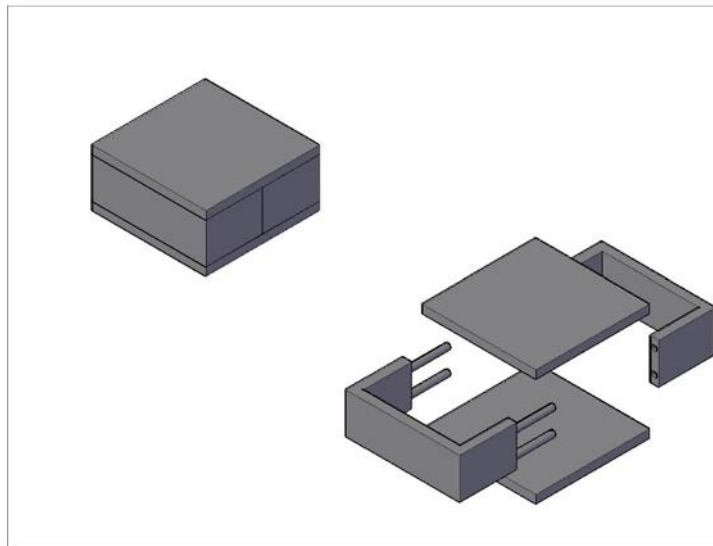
Sample box made out of metallic sheet used on hotplate, with dimensions of 70 mm×70 mm and height of 34 mm.
